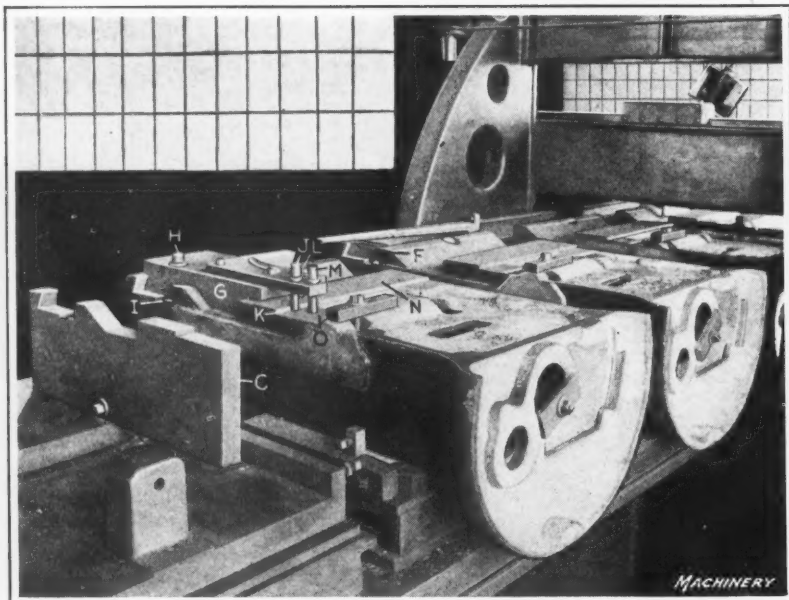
View of Planer shown in Fig. 3 from the Opposite Side of the Housings. Here are shown Gages provided for testing the Accuracy of the Planed Surfaces
